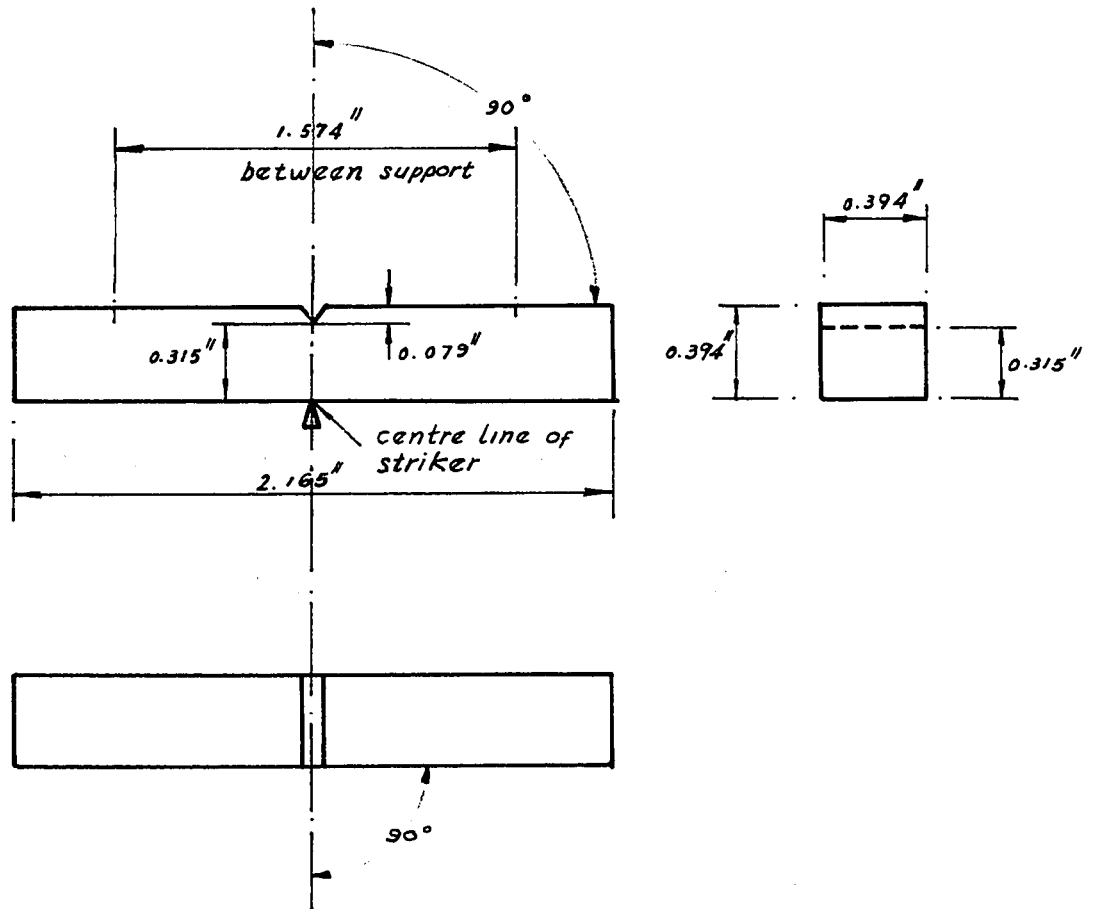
THE DIMENSIONS AND SHAPES OF V-NOTCH IMPACT TEST SPECIMENS
